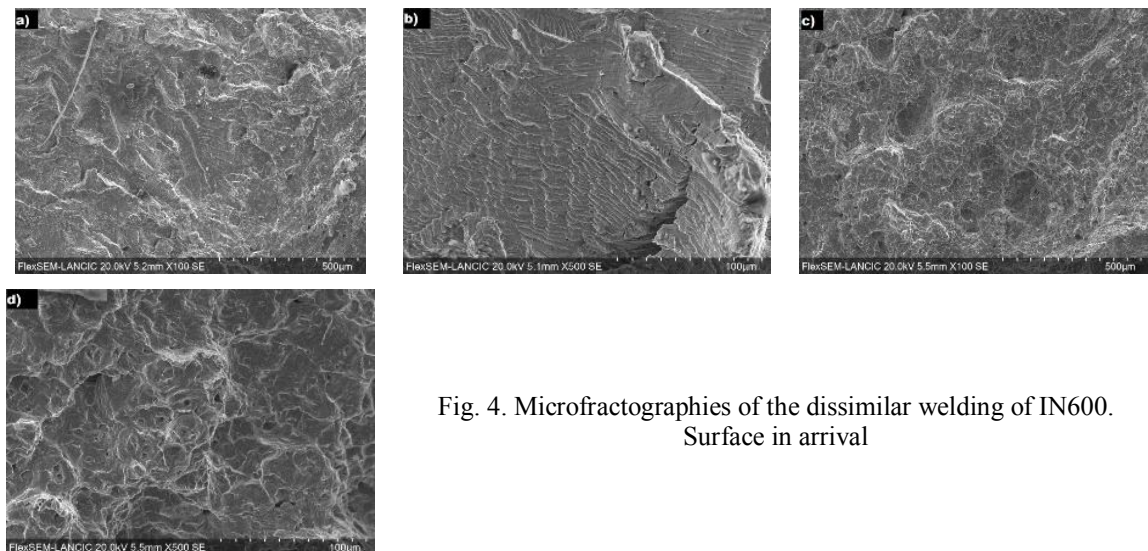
Microfractographies of the dissimilar welding of IN600. Surface in arrival
